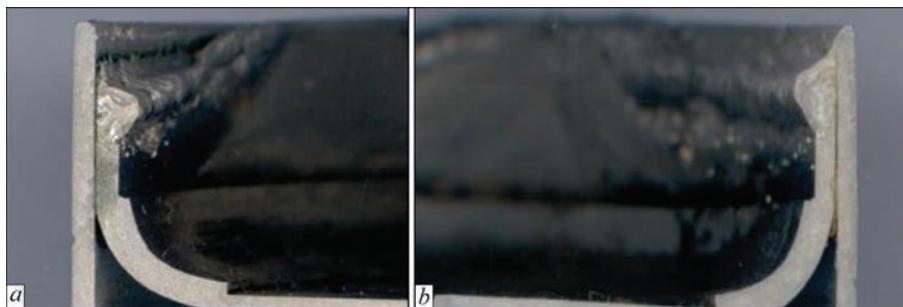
Defects of welded joint formation caused by violation of the technological mode of assembly and welding: *a* — leaking of weld metal down the inner side wall; *b* — loss of weld shape, undercut of the inner edge
